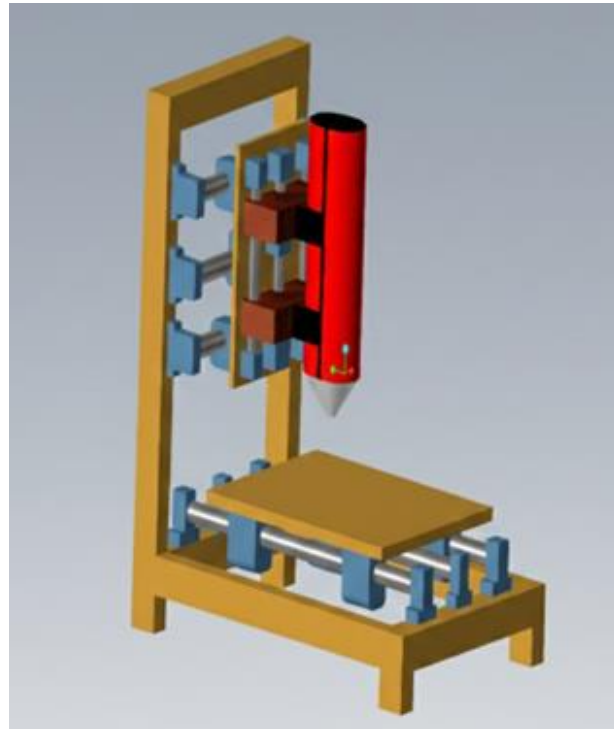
3D CAD model of the complete 3-axis CNC milling machine, illustrating the X, Y, and Z-axis assemblies, frame structure, linear guides, and integrated spindle unit.
